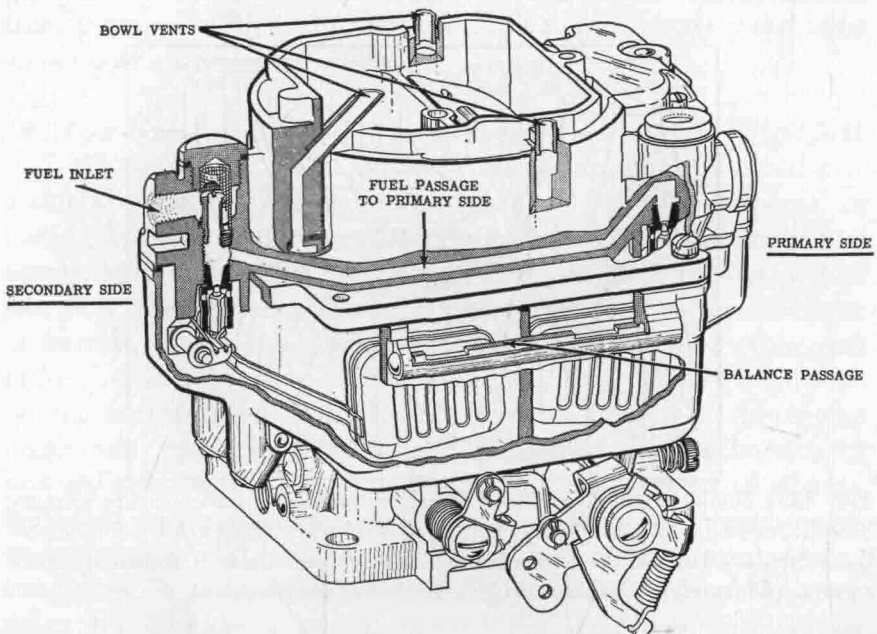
Float system of four-barrel carburetor. (*Oldsmobile Division of General Motors Corporation*)
